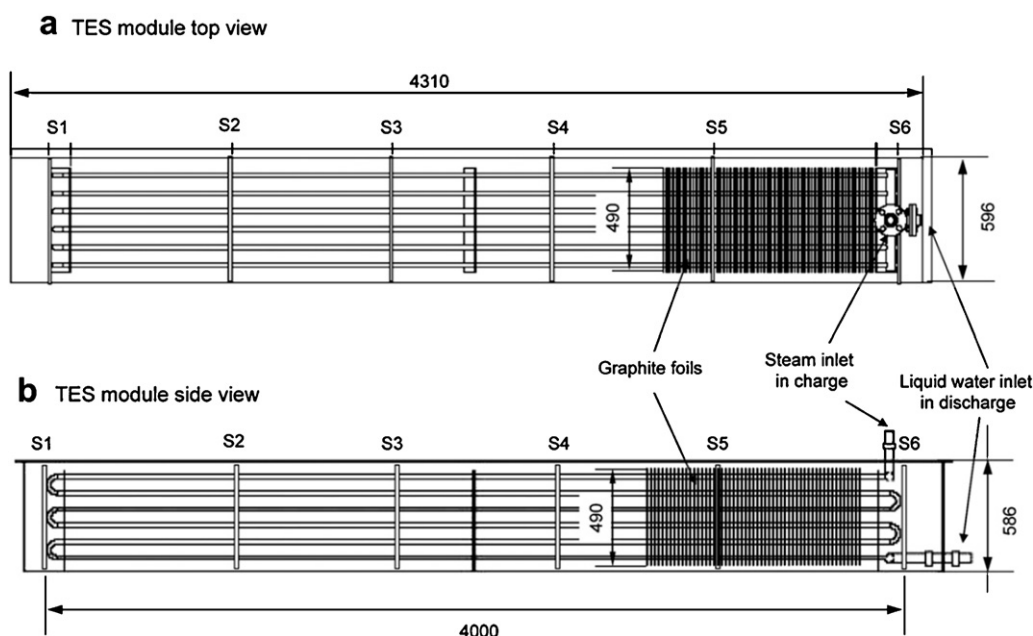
Sketch of storage prototype dimensions: (a) top-view and (b) side view (all dimensions are given in mm) [59].
